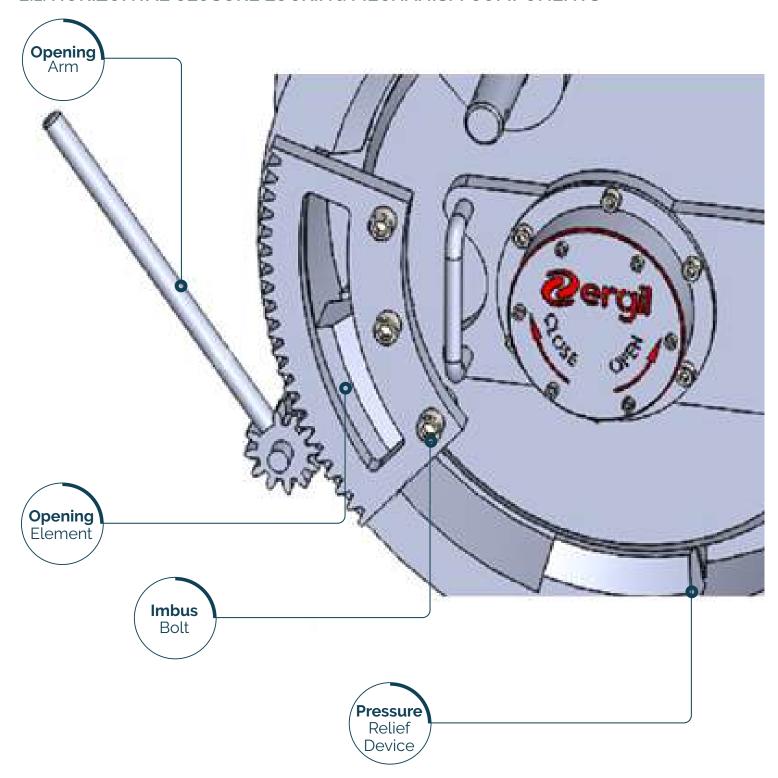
Horizontal Closure Locking Mechanism Compo-
